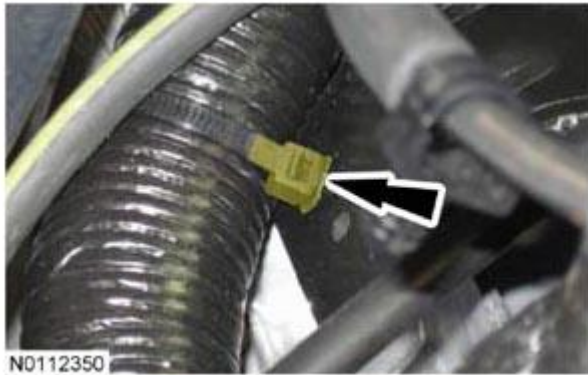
Locating Wiring Harness Retainer From Selector Lever Cable Bracket
